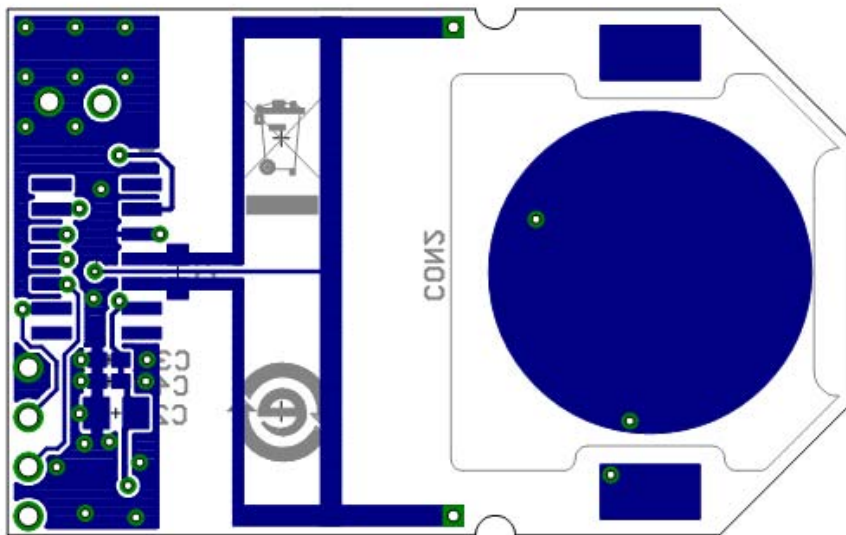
Antenna Bottom Layout with Final Outer Dimensions
